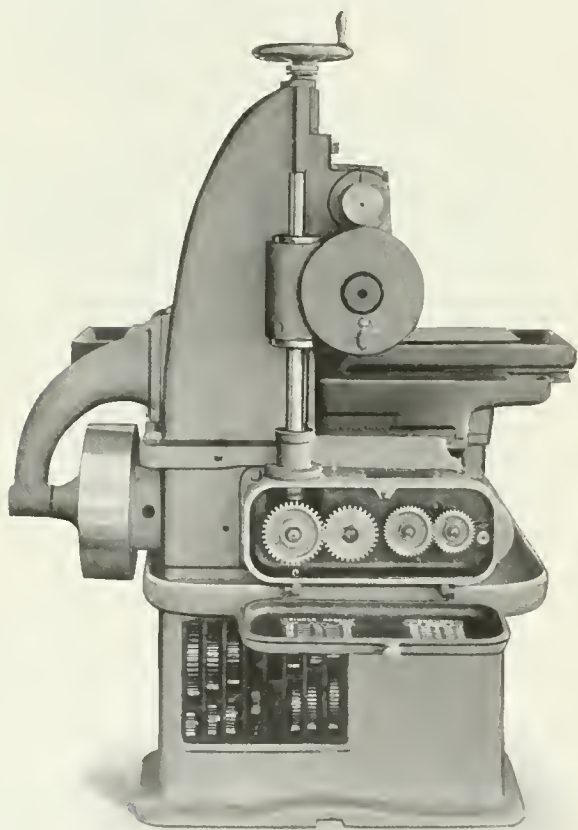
Rear View showing Change-gear Case and Cabinet Base
